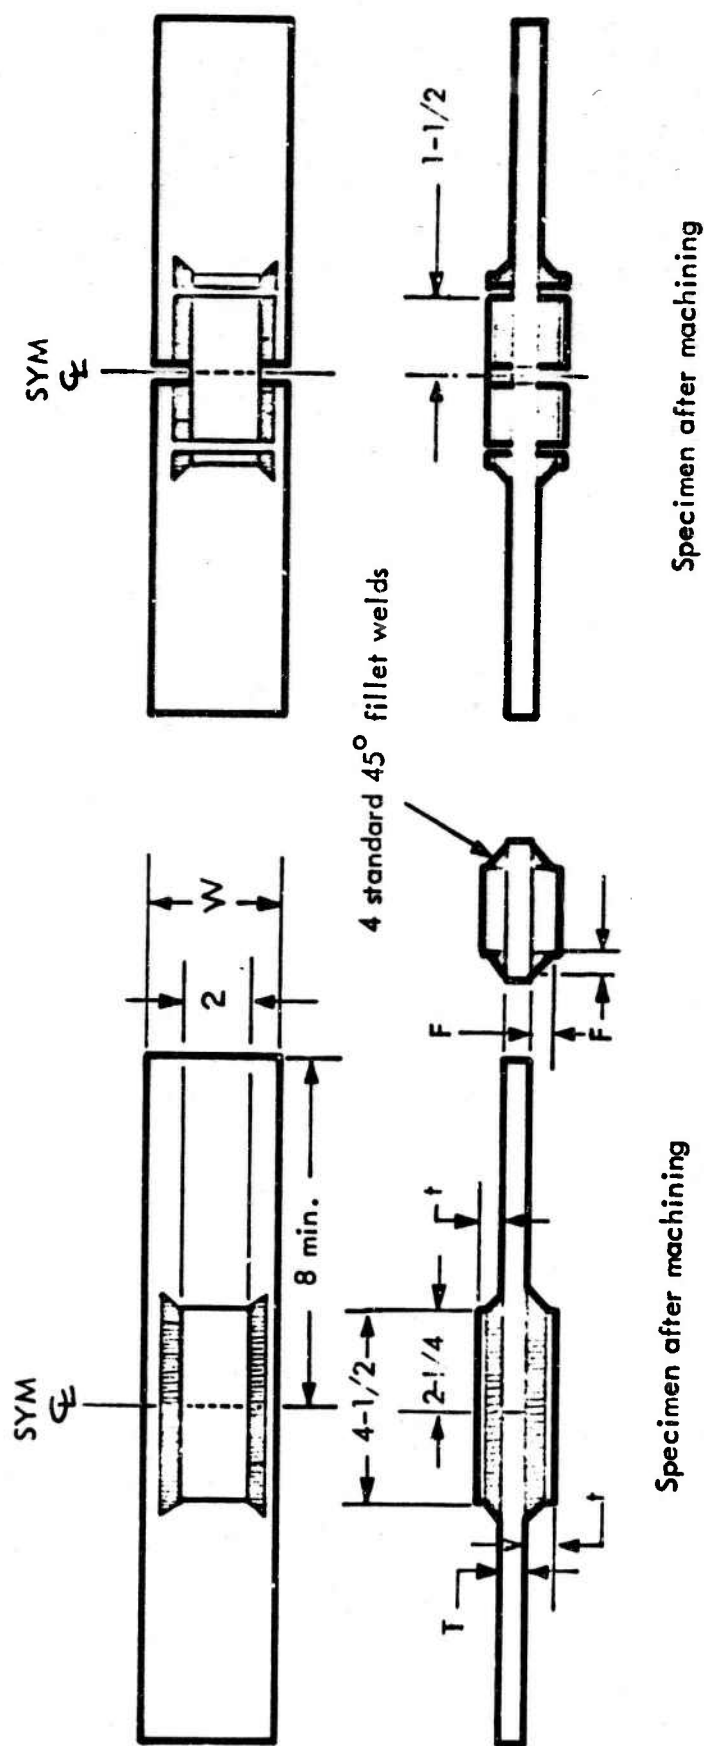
TRANSVERSE FILLET WELD SHEARING COUPON
